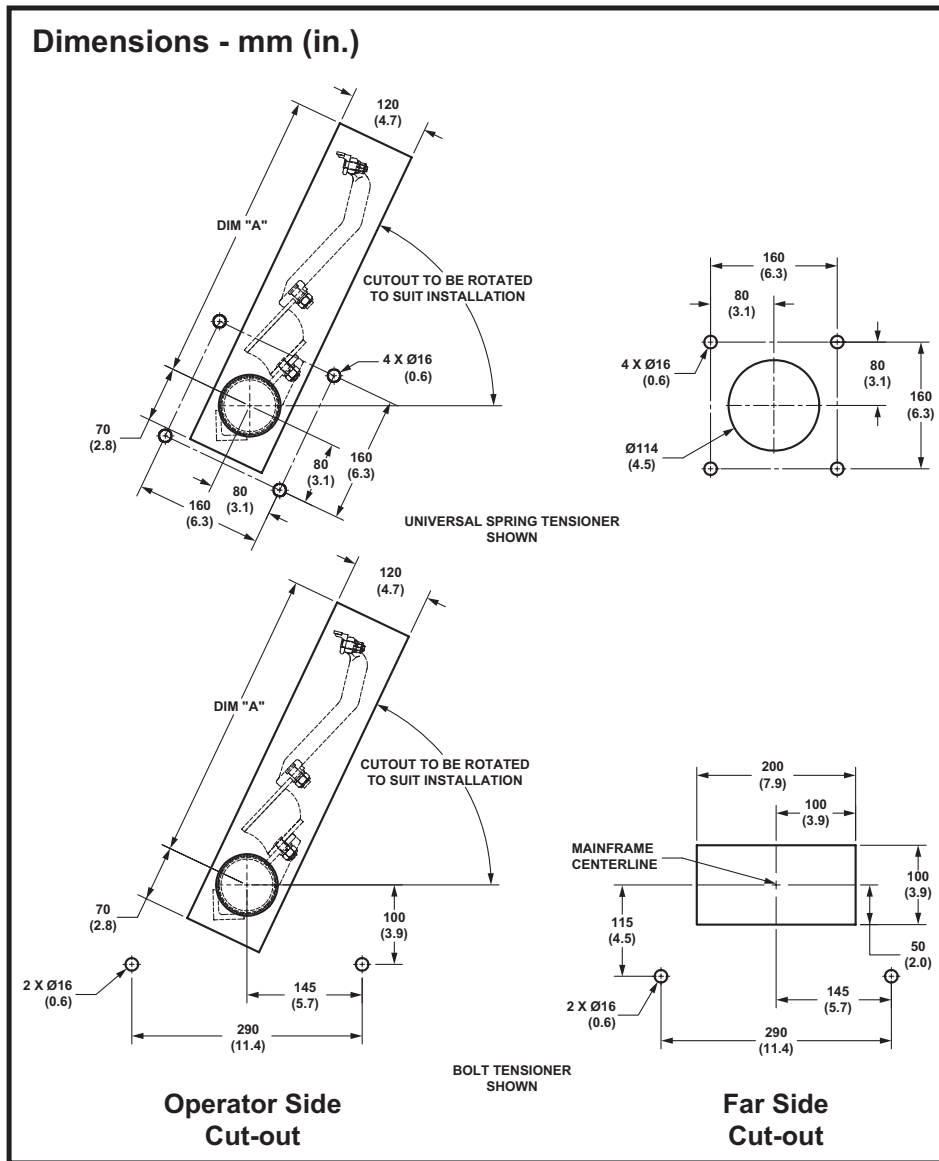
Martin® H1 Primary Belt Cleaner HD Chute Cutout Details
